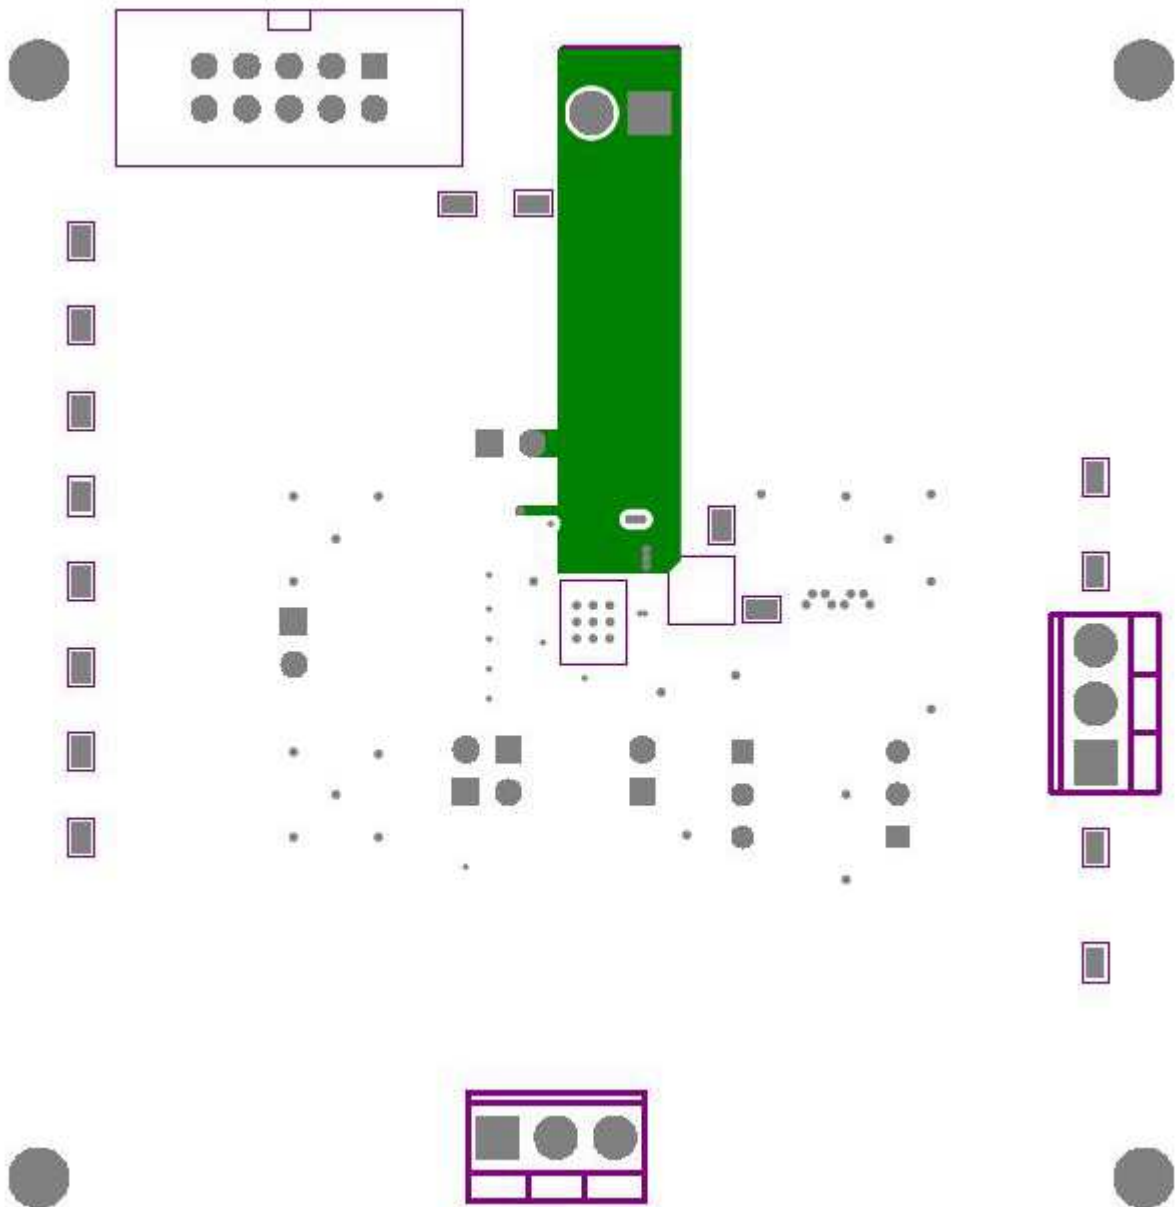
Board Layout (Middle 3<sup>rd</sup>) Layer
